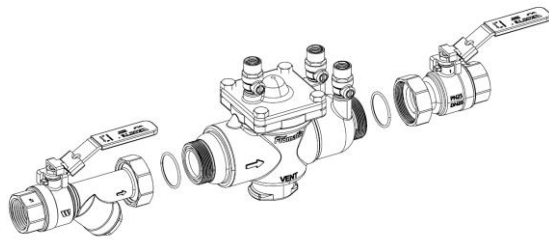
Assembly of RPZ Device with union ball valve and strainer
